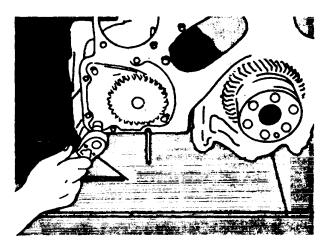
N-34. Tighten the Lubricating Oil Pump Capscrews
